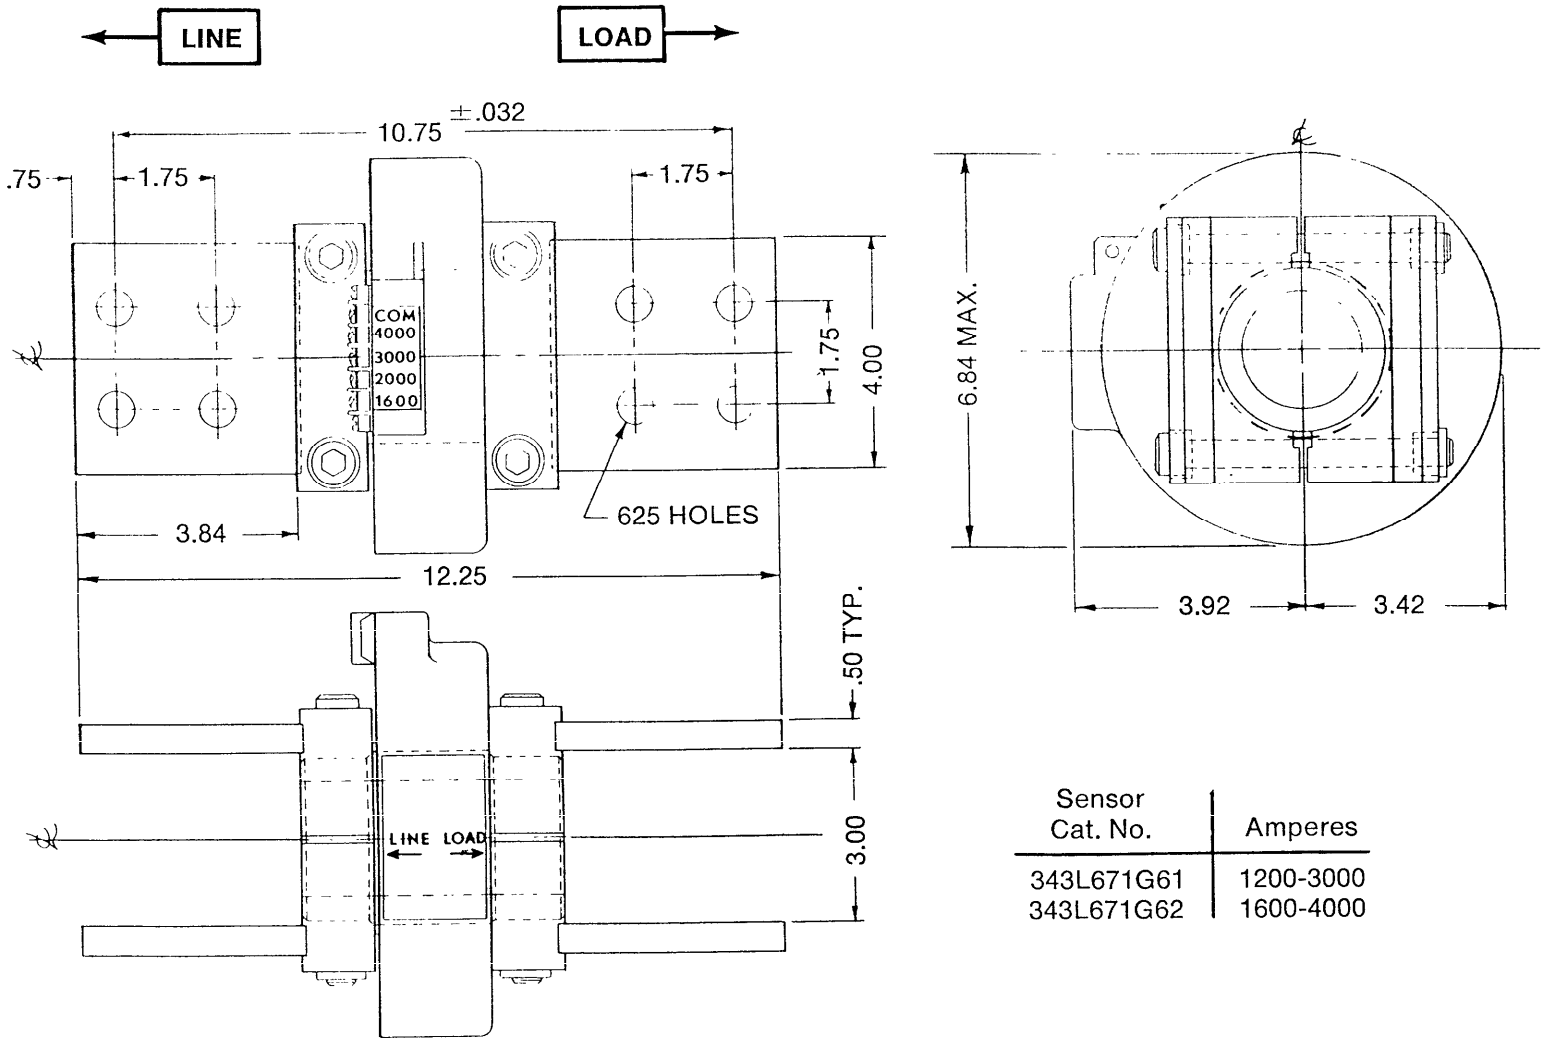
Outline of SST 4th-wire neutral sensors (from Outline Dwg. 568B227).
